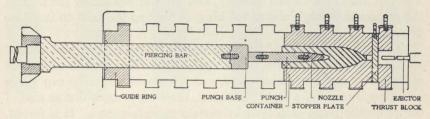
Fixture for Shaping and Punching Large Shell.
